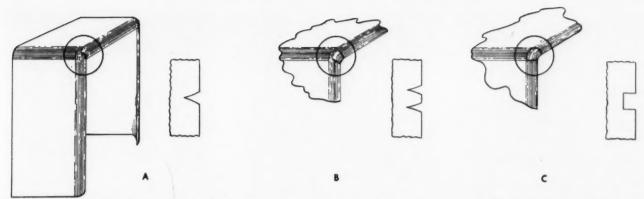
These sketches show three methods for forming round or rolled corners by welding. Sketches A and B show single and double cuts to remove wrinkles in forming. The cuts are later welded. Sketch C shows a corner inset for use in heavy plate where wrinkling is impossible to avoid.
